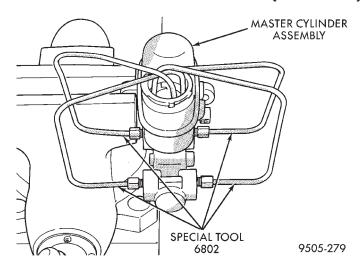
Bleeding Tubes Attached to Master Cylinder
